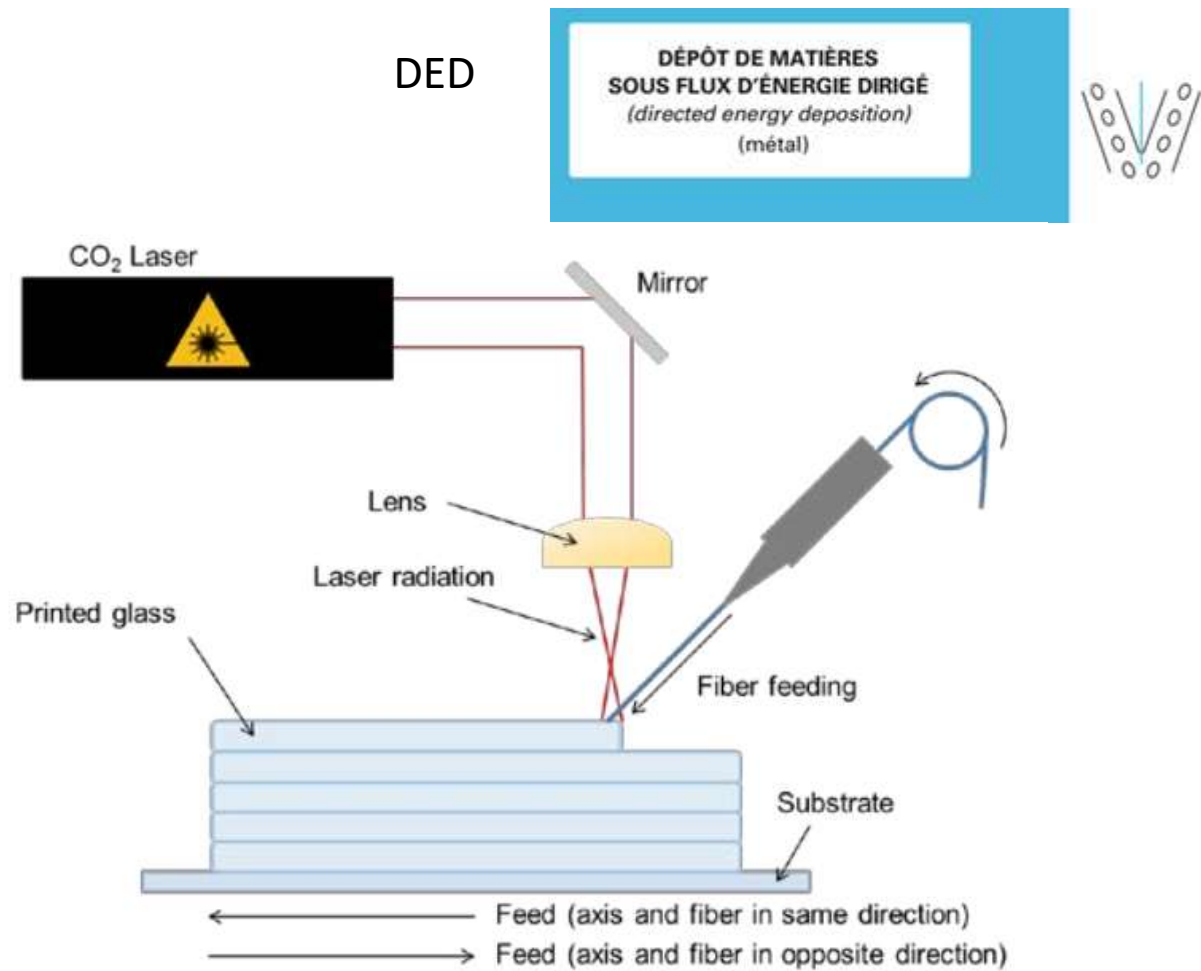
Sketch of CO₂ laser glass deposition printing setup
